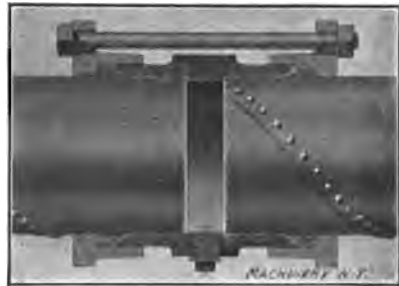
Pipe Joint in Spiral Riveted Pipe Line
